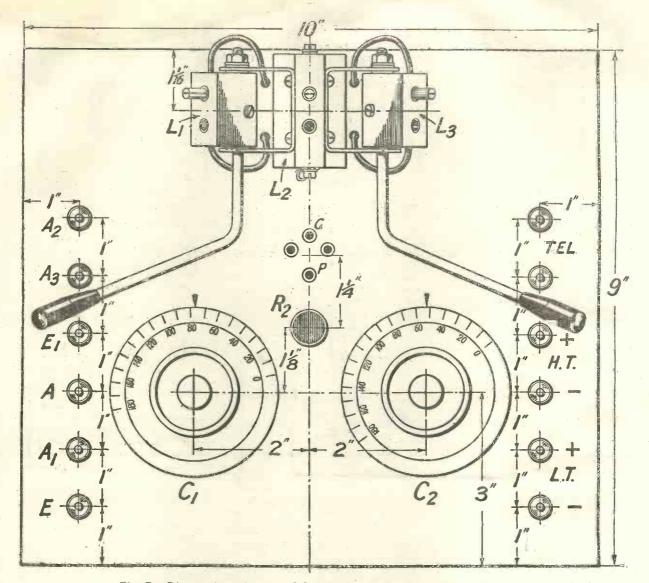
Dimensioned plan of front of panel. Blue Print No. 67A.
